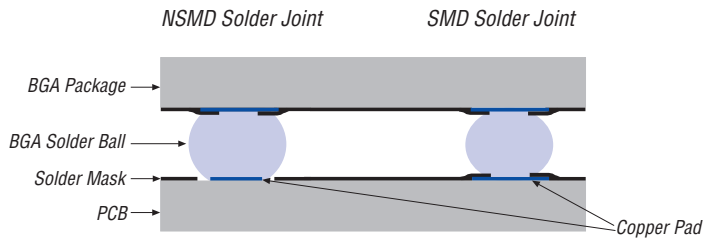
shows the side view for an NSMD and SMD solder joint.
